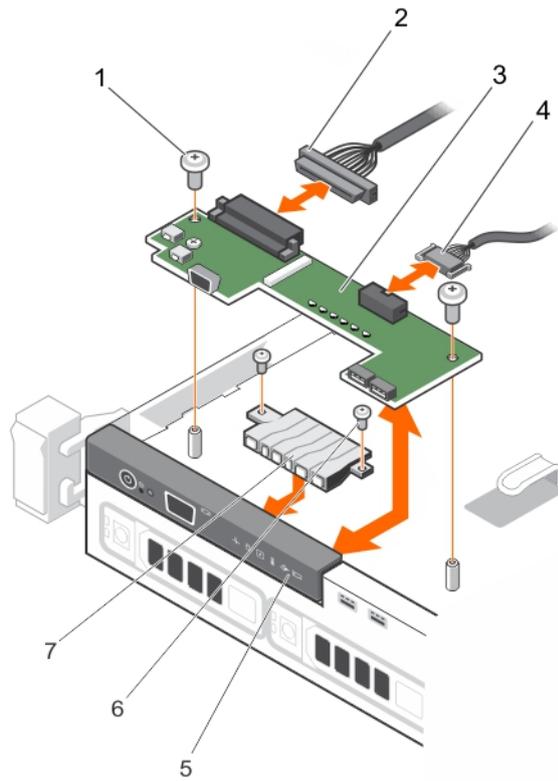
Removing and installing the control-panel module—four cabled hard-drive chassis
